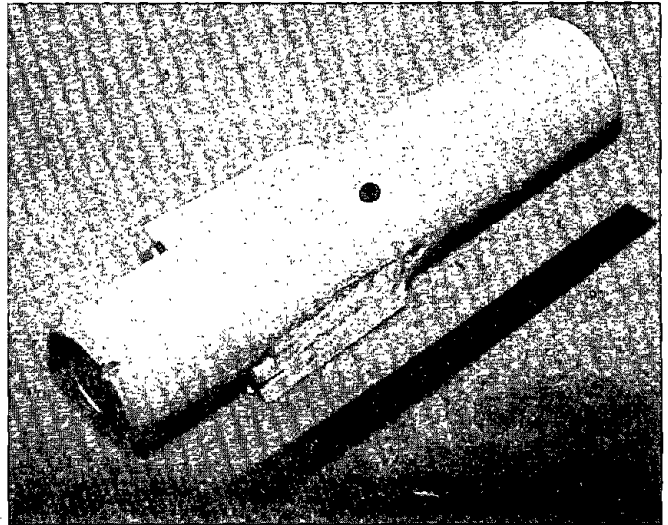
FRACTURE CONTROL OPENING CUT
